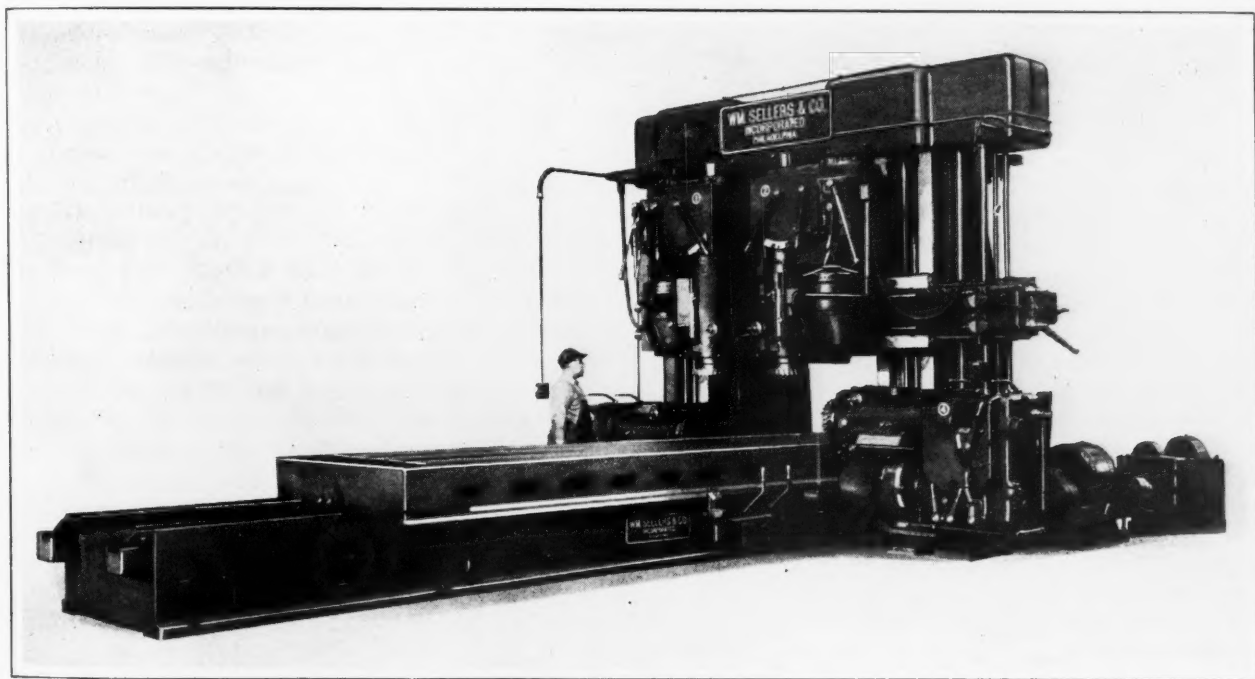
Sellers Planer-type Milling Machine which is being Brought Out in Various Sizes
